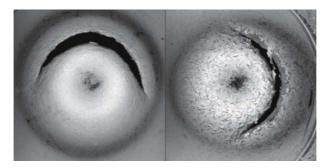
Steel sheets with good (left) and bad (right) adhesion of coating
